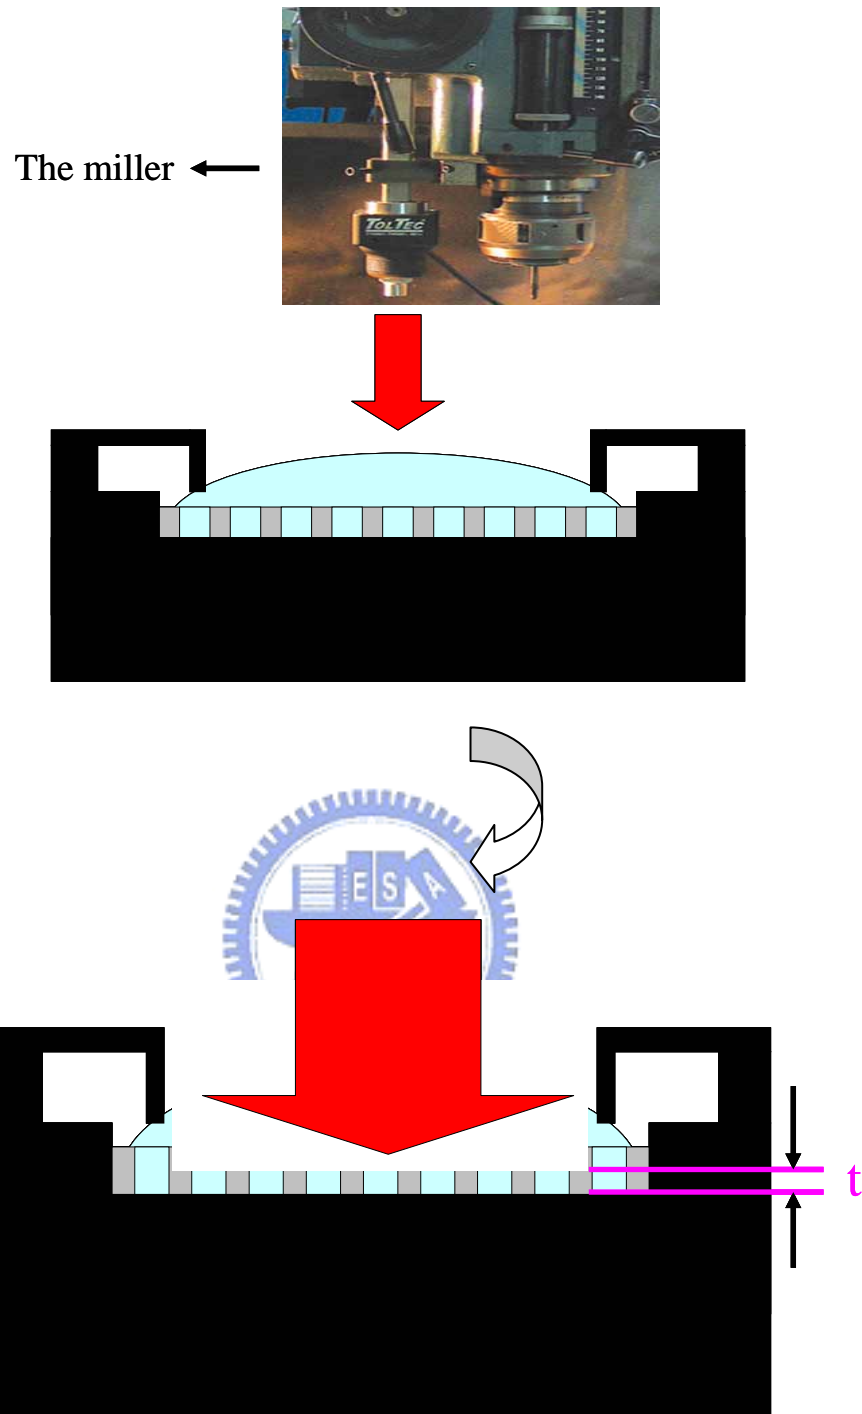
(c) Procedure 2 of fabricating the MHA which holes filled with UV-gel. Using the miller to drill the MHA, and to obtain a thickness t we want.
